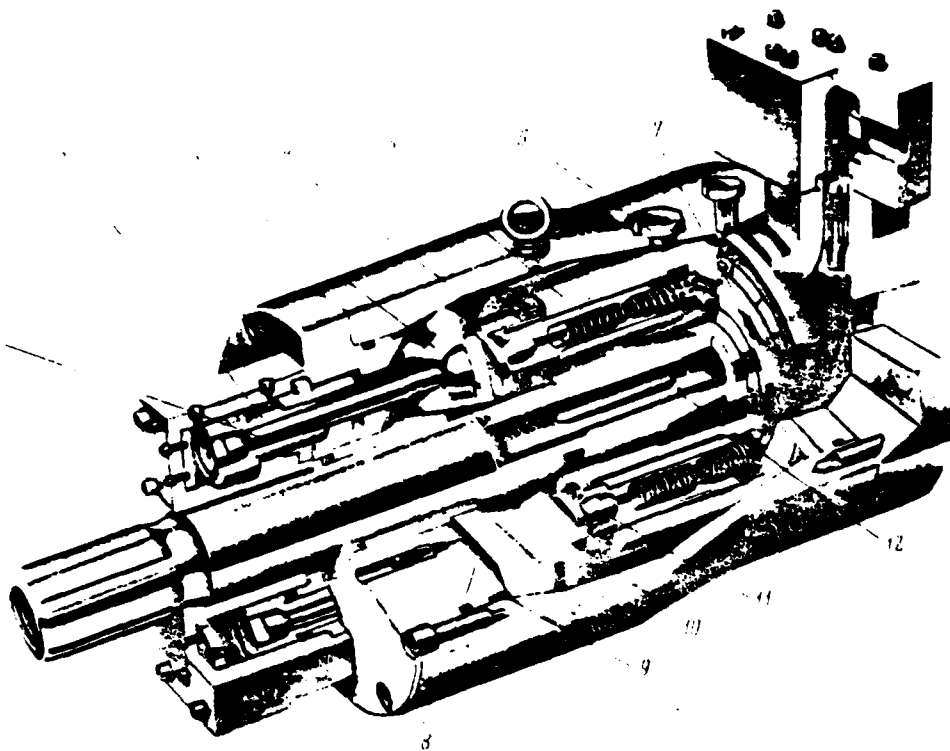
The general view of pump with the slant of variable/alternating displacement (VW 20). 1 - pulling rod of disk; 2 - performing plunger; 3 - slant; 4 - pistons; 5 - rotating cylindrical unit; 6 - drain hole of housing; 7 - plate, which closes opening/aperture; 8 - hydrostatic holders; 9 - bearing of slant; 10 - slider-type plate; 11 - crosshead with ball bearing; 12 - slots/grooves for the connection of the second pump.
